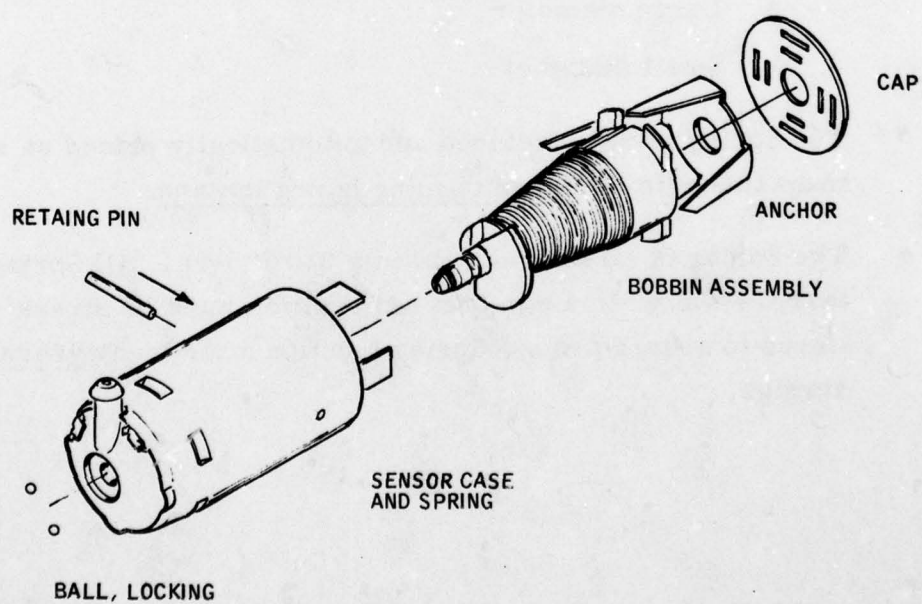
XM74 Sensor Case and Bobbin Assembly
